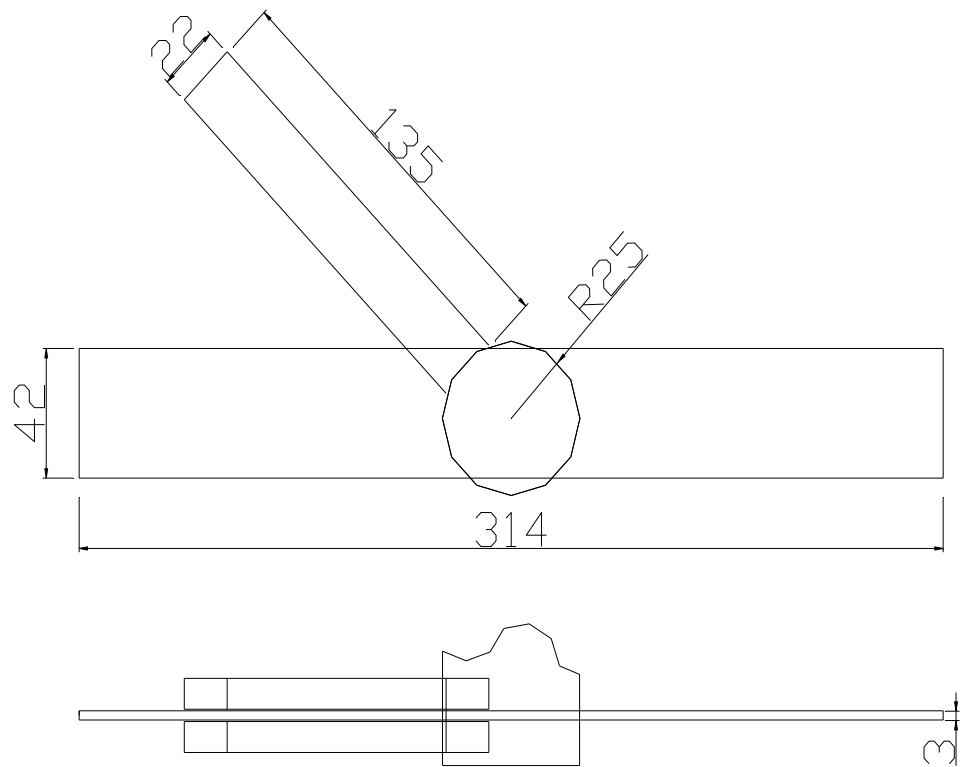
BLADE-IMPELLER ARRANGEMENT
